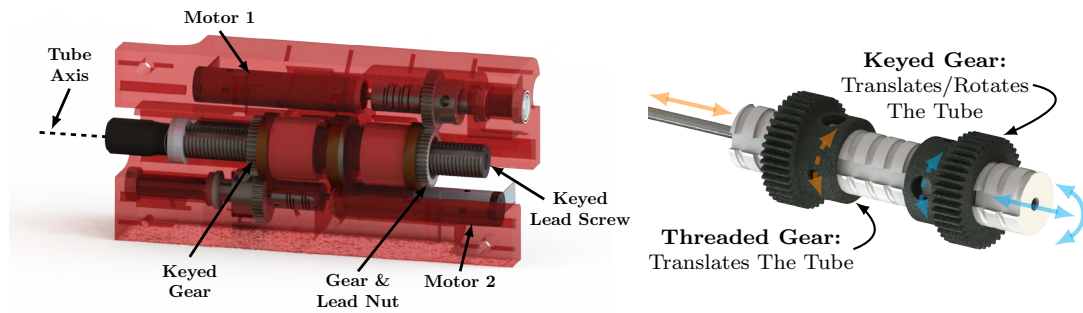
(Left) The mechanism design of a single tube module. (Right) A close up of the keyed bolt mechanism showing the details of its differential drive actuation.
